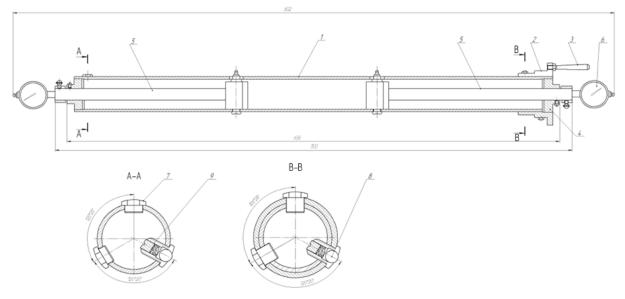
The PKV-2 device for checking the alignment of the camshaft middle bearing holes relative to the outer bearings consists of: 1 – housing; 2 - flange; 3 – handle; 4 – pressing stop; 5 – collet; 6 – dial gauge head; 7 – pressing stop; 8 –ball; 9 – leg
